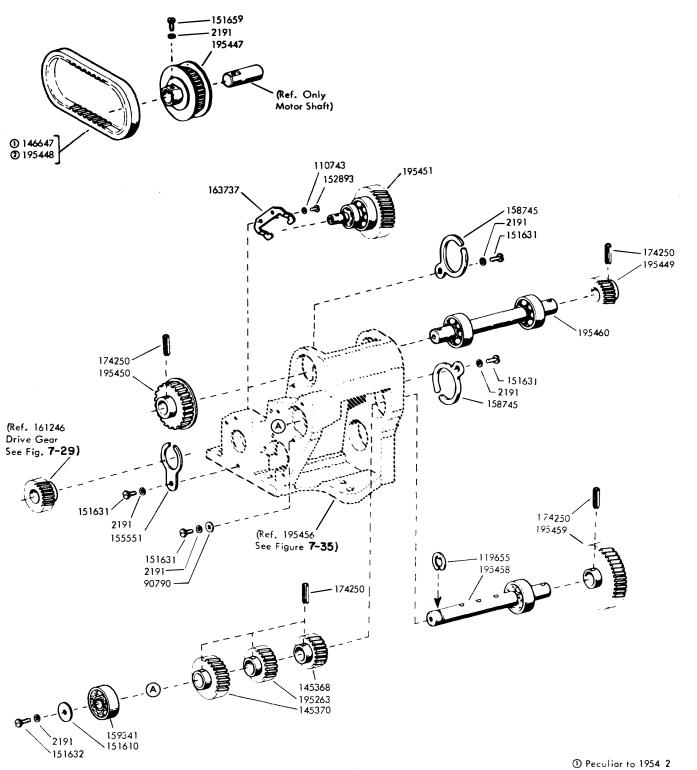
Modification Kits 195442 and 195443 to Add Three-Speed Gearshift Assemblies (Sheet 2 of 3)
